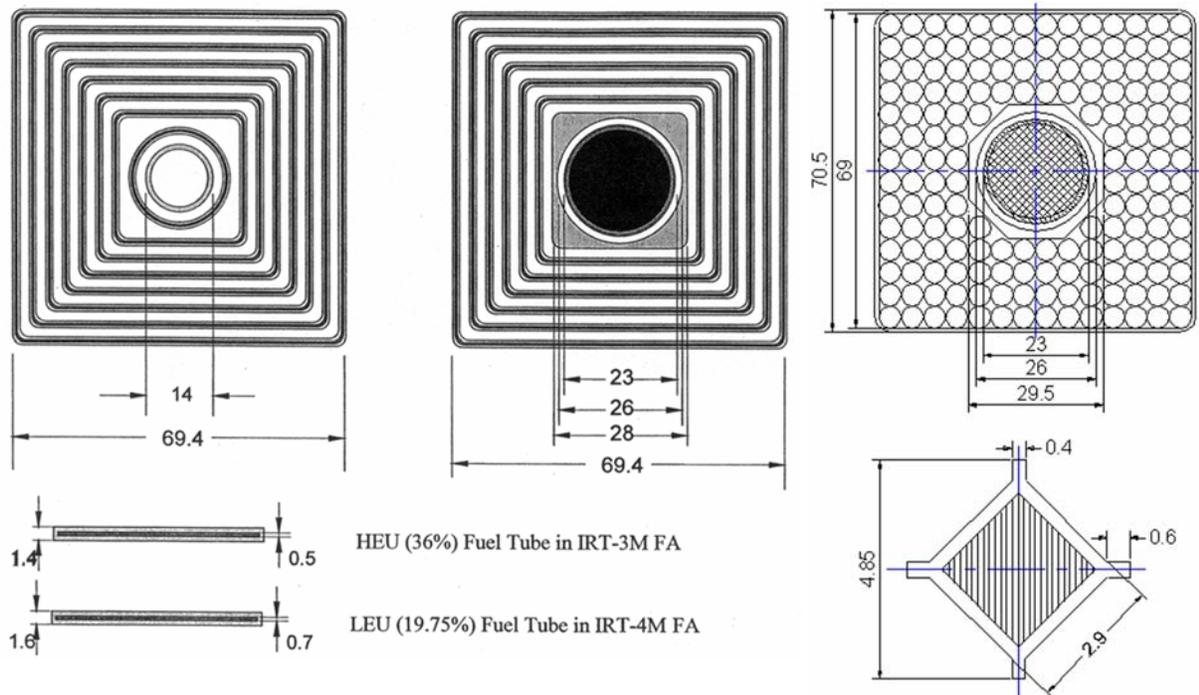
Horizontal Cross Sections of 6-Tube and 8-Tube FA's and a Proposed LEU 164-Pin Fuel Assembly
